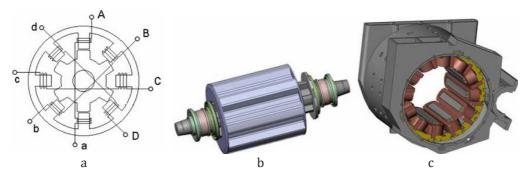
Design of induction machine: a – layout diagram; b – rotor design; c – stator design.
